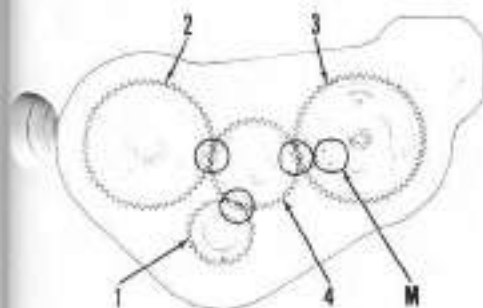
View showing timing marks on crankshaft gear (1), camshaft gear (2), injection pump drive gear (3) and idler gear (4) on four-cylinder engines. On earlier model 990, the two marks (M) on injection pump drive adapter are placed to same side of gear as gear timing marks.
